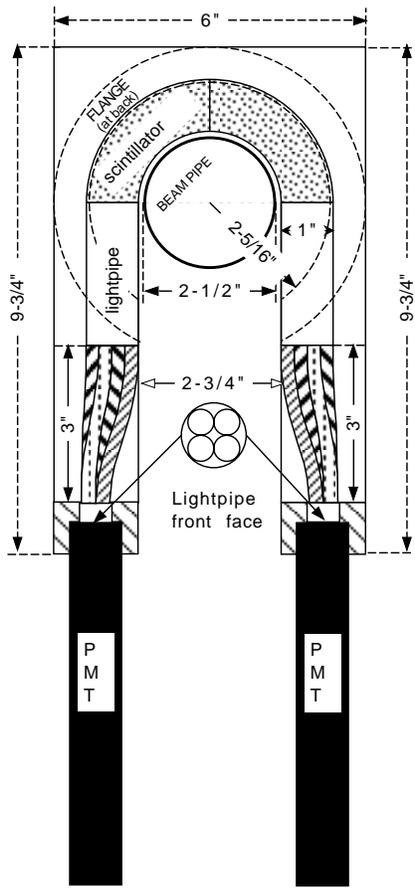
Construction of the BSC-2 beam shower counters at CDF.
